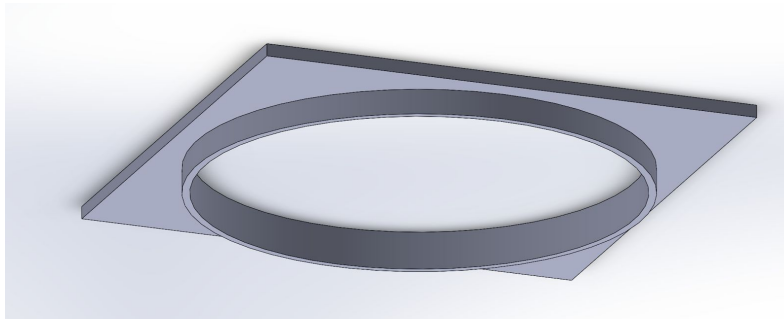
The top piece of the mold will go on last. The bottom protruding aluminum ring will sit on the top surface of the 10 layers of carbon. Once the top piece is secured, the last 4 layers of carbon will be pressed into the surface created by the inner surfaces of the protruding rings and the carbon.
